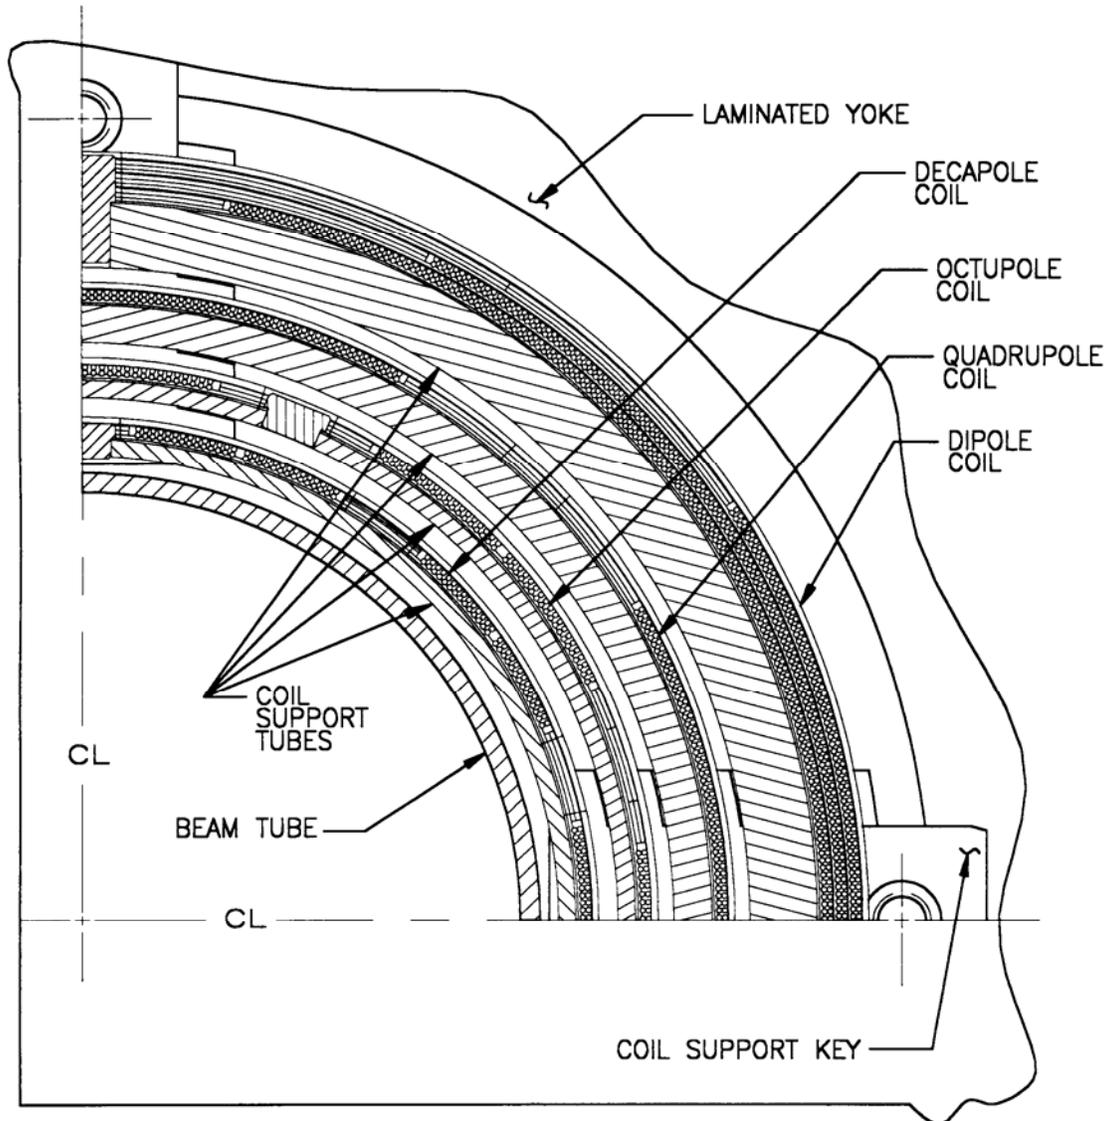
Arc corrector coil cross-section (beam tube i.d. = 69 mm).
